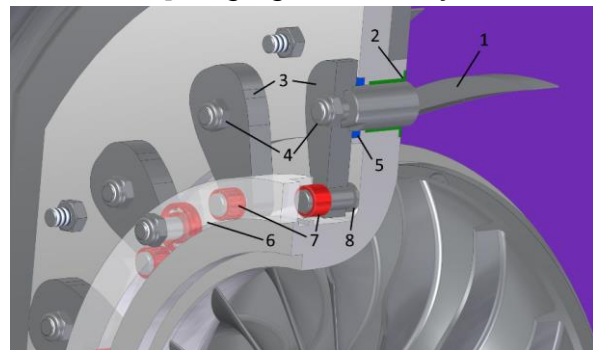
Section through the VVD adjustment mechanism, where: 1 – VVD blade; 2 – Teflon bushing; 3 – lever; 4 – nut; 5 – sealing gasket; 6 – adjusting ring; 7 – needle roller bearings; 8 – bolt [image generated by the author]
